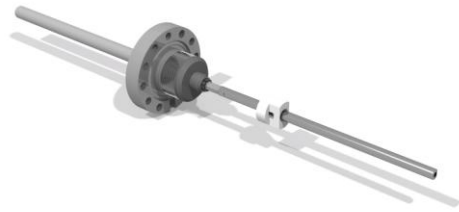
Remove the shaft carefully: Avoid tilting the shaft axis. Tilting may damage the inner magnet assembly.
